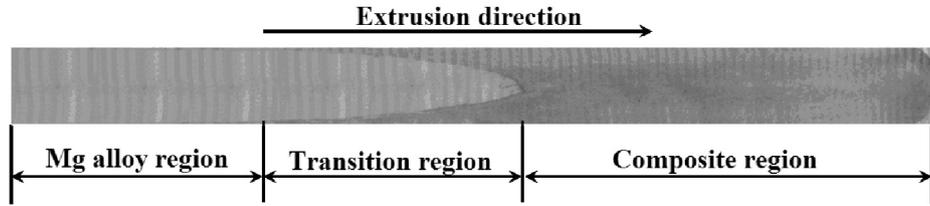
Longitudinal section of composite rod fabricated by extrusion directly following vacuum infiltration technique.
